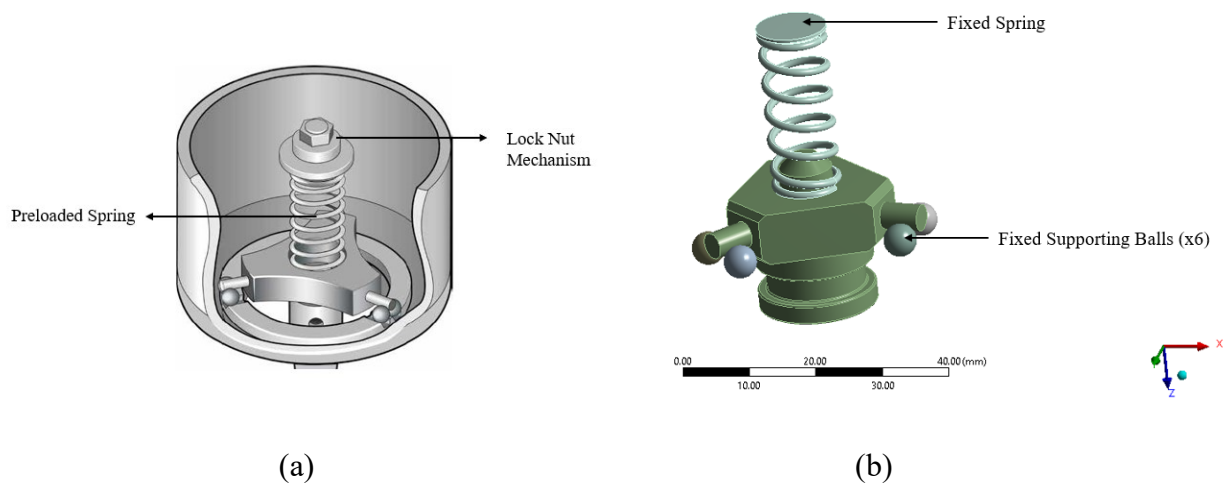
(a) Lock nut mechanism in physical probe; (b) Fixed spring boundary condition
